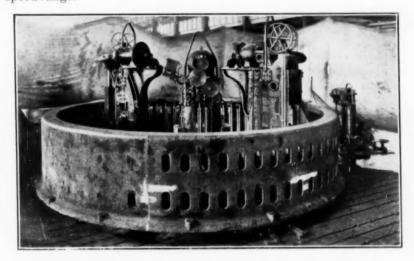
Application of Motor to Machine Tools on Iron Floor Plate
